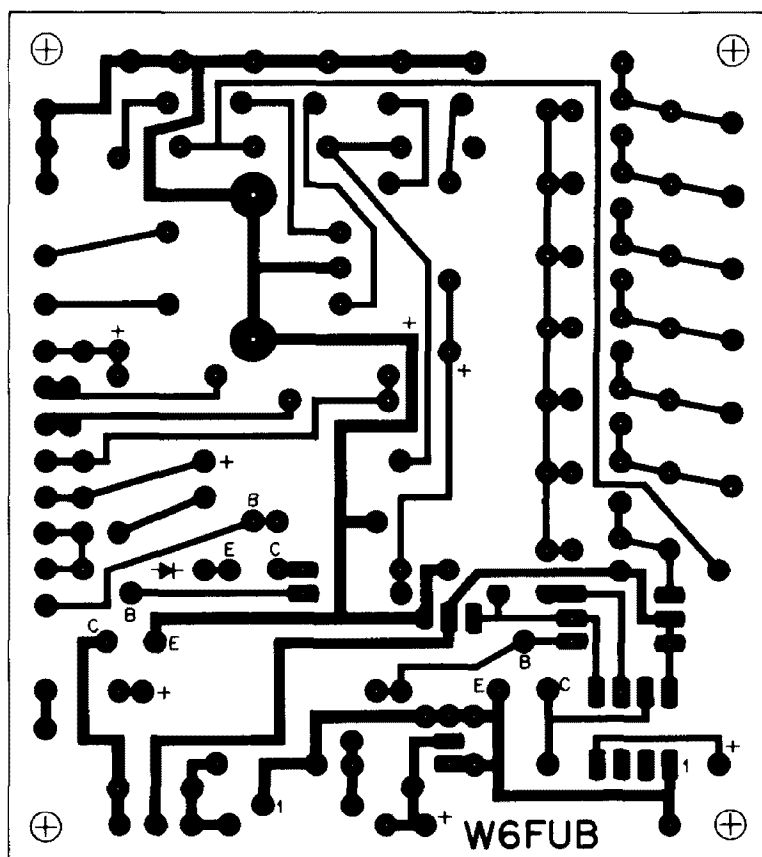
Full-size printed-circuit board for the universal tone encoder. Component layout is shown in fig. 3.
